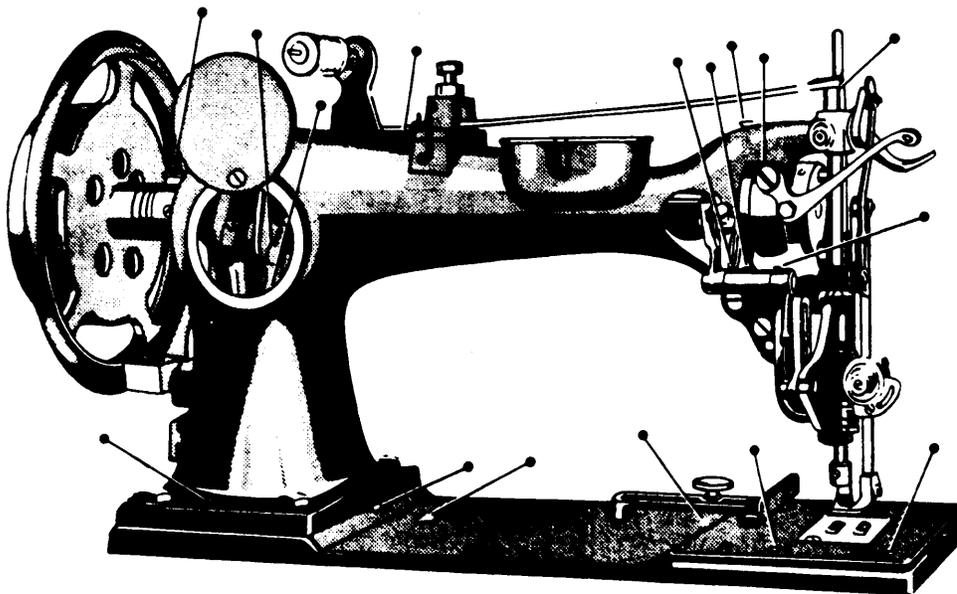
Oiling points at the back of the 7-33 sewing machine.
